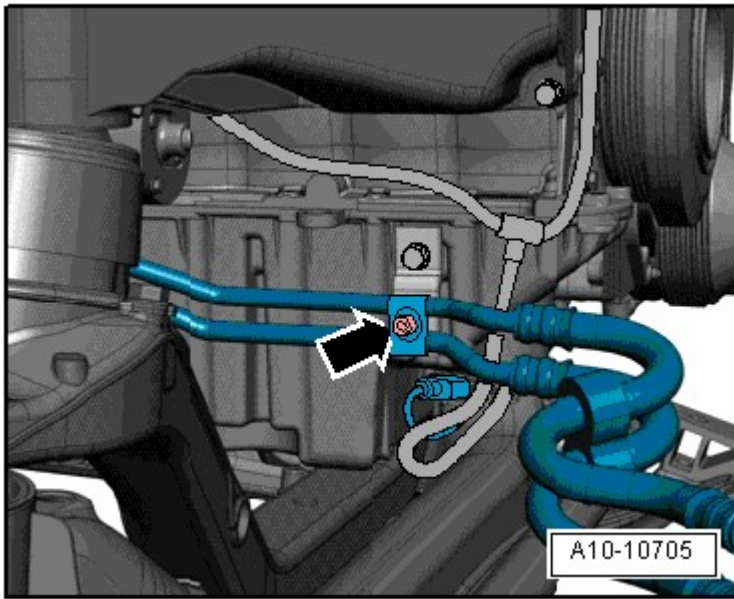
Identifying Bolt -Arrow- To ATF Line Bracket
